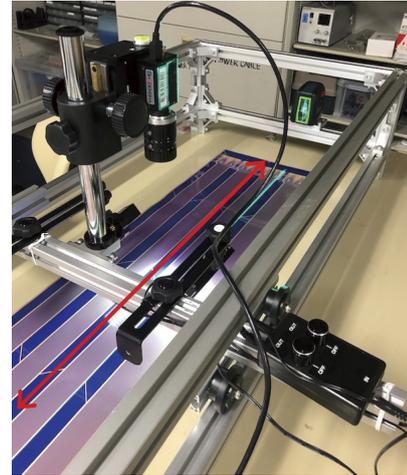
Inspection fixture and camera for the signal-line pattern of BEX.
